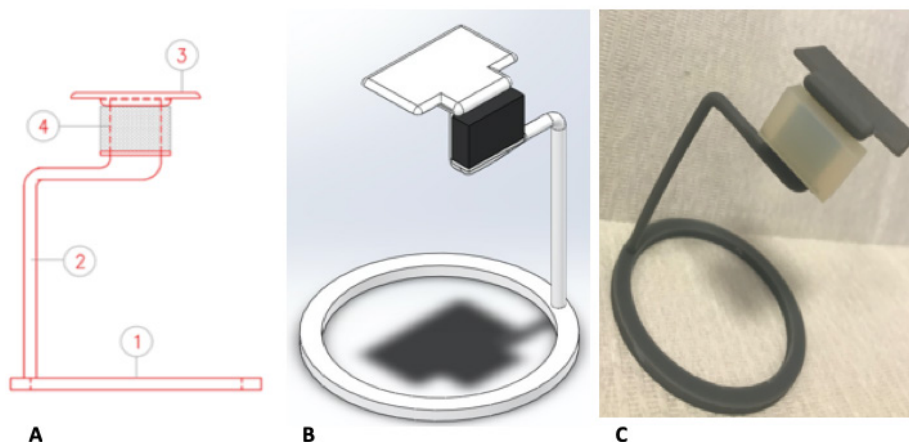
Customized positioner development: A) initial two-dimensional draft; B) three-dimensional view of the device; C) device printed by a 3D printer, ready for further testing
